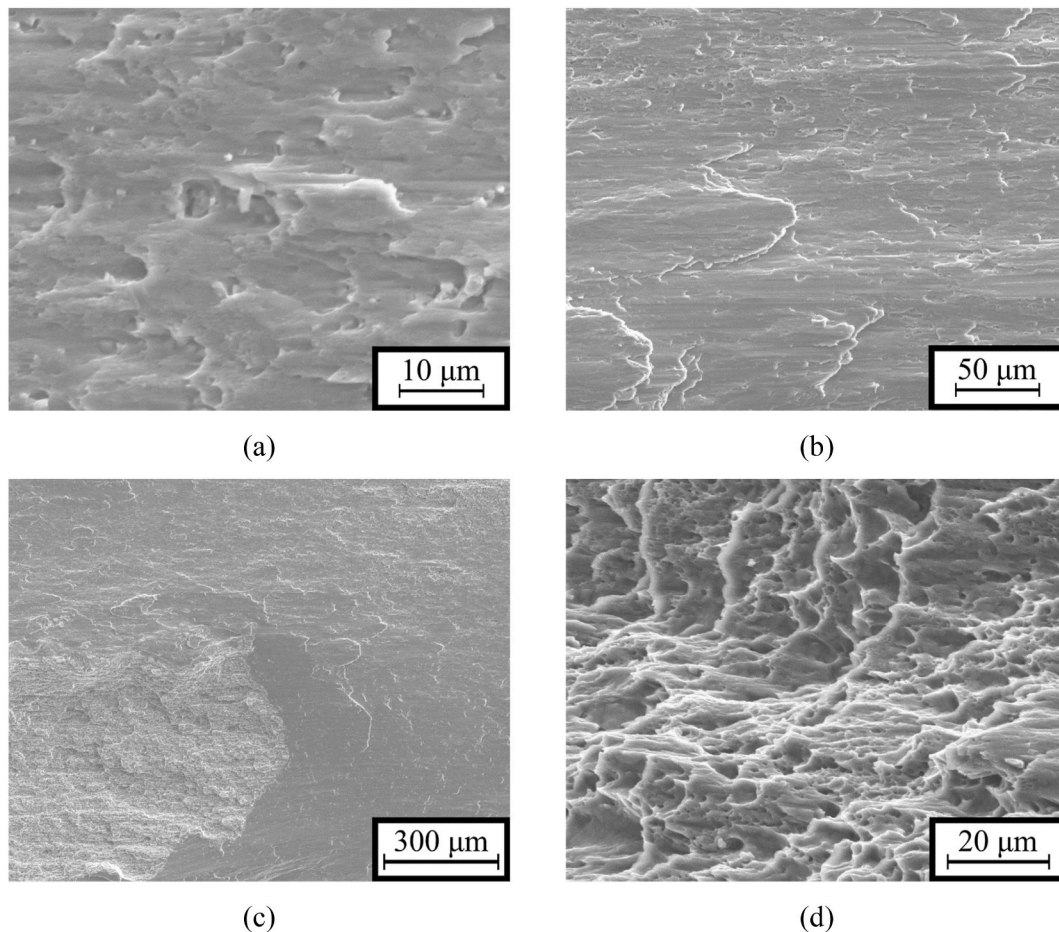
SEM images showing typical features of the fracture surfaces: (a) ripple-like shear surface (B6), (b) flat shear surface (B6), (c) flat shear surface interrupted by a zone of dimples (B6), and (d) slanted dimples at the edge of the specimen (A6).
